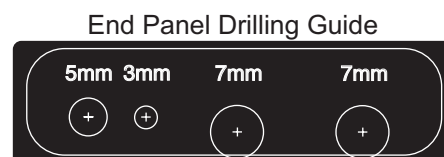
the end panel drilling template. Drill pilot holes first to ensure they are accurately positioned, then carefully enlarge them to size.
